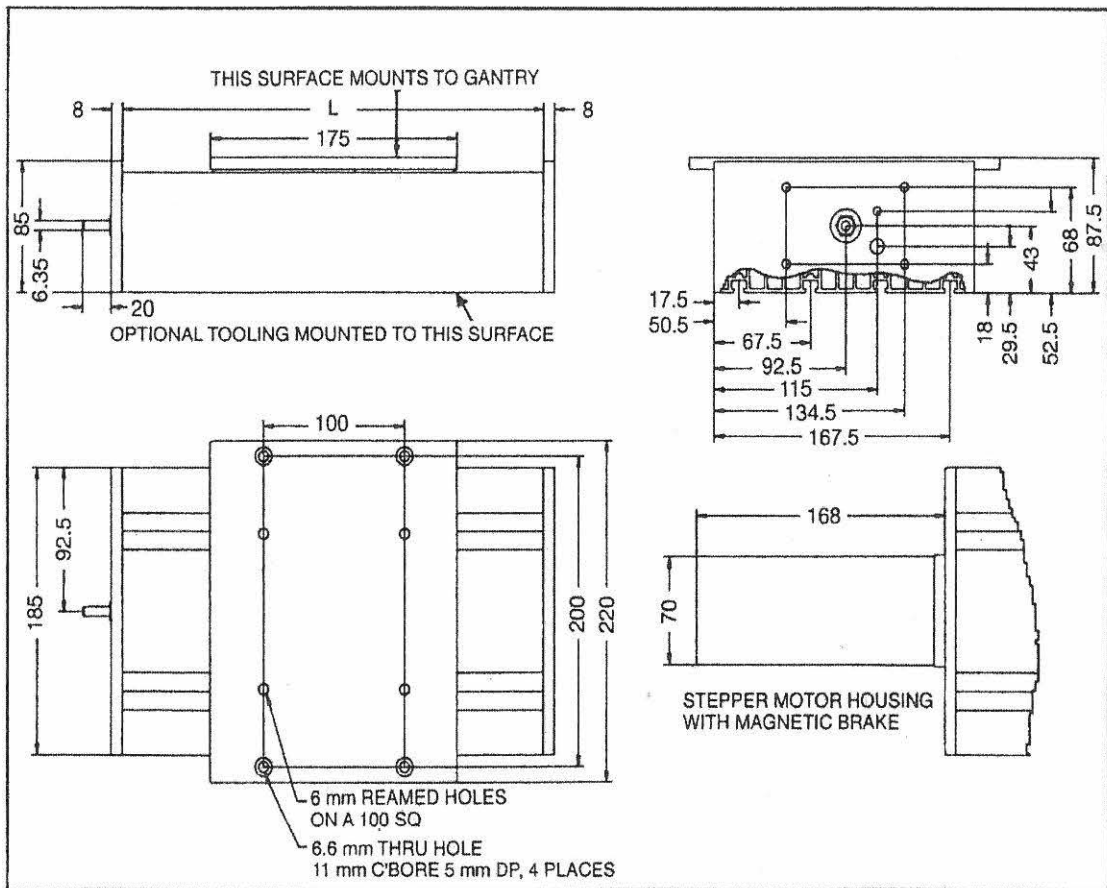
Dimension layout of Z-axis slide for gantry
